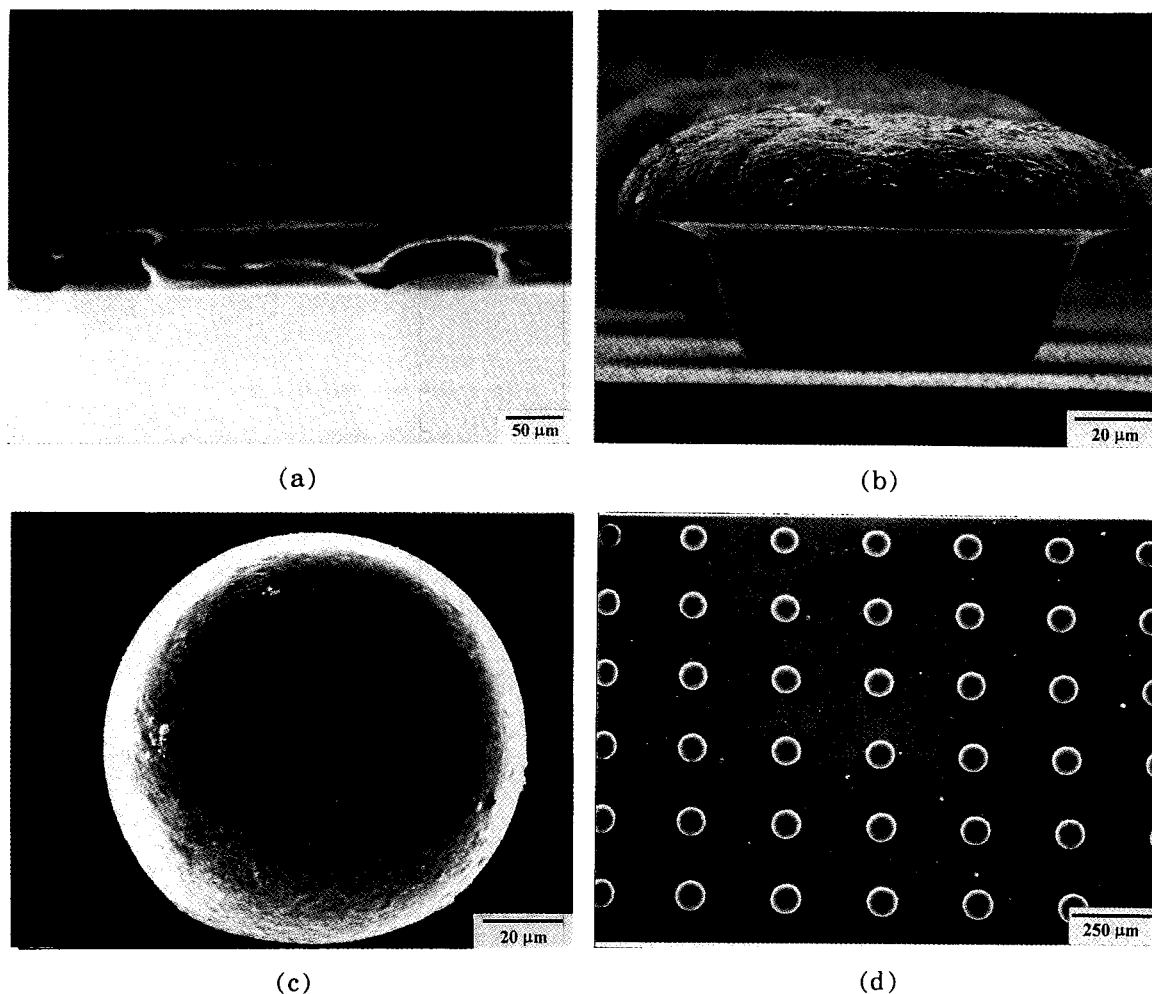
(a) Patterned photoresist-40µm thickness (b) Mushroom shaped solder bump (c) Solder ball after reflow (d) Area array type solder bumps(Pitch 280µm, Ball size 100µm)
